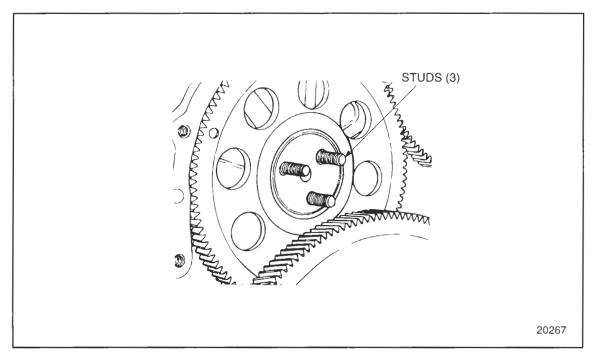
Adjustable Idler Gear and Hub Mounting
